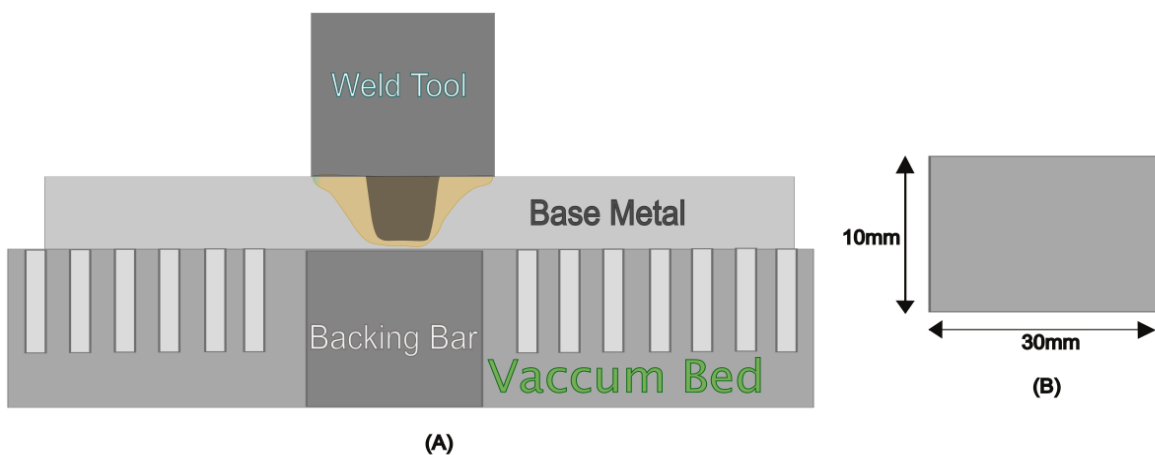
(A) Position of the backing bar in the welding platform; (B) Cross-sectional dimension of the backing bar
